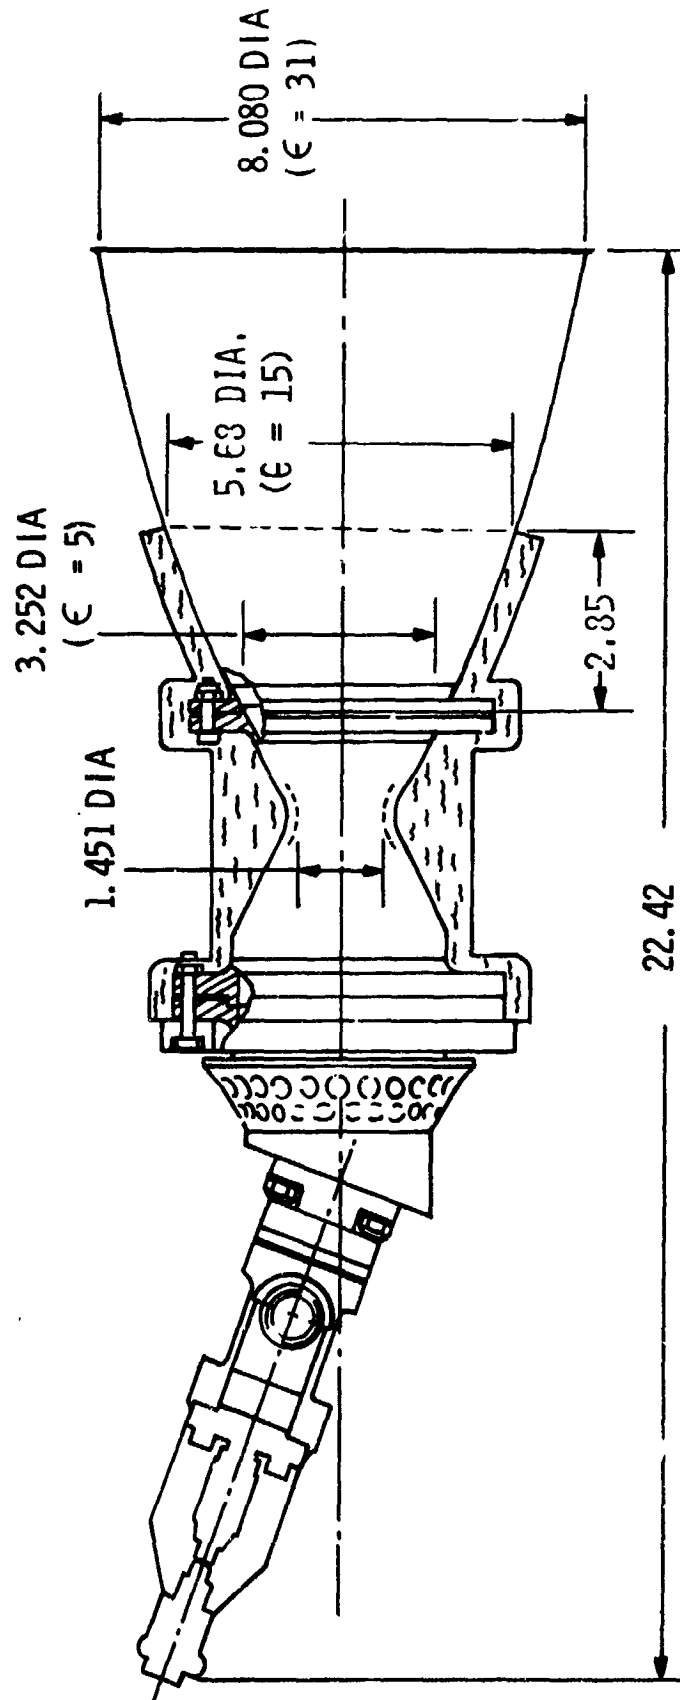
Prototype Engine (With Test Valve) and Thermal Insulation
